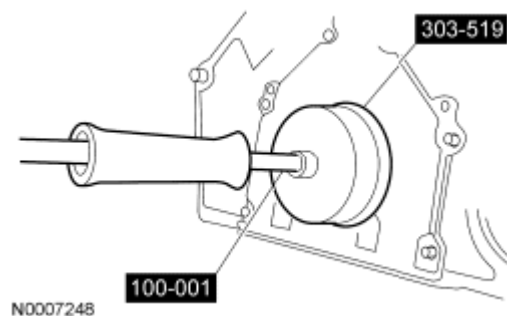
Identifying Slide Hammer And Crankshaft Rear Seal Remover
